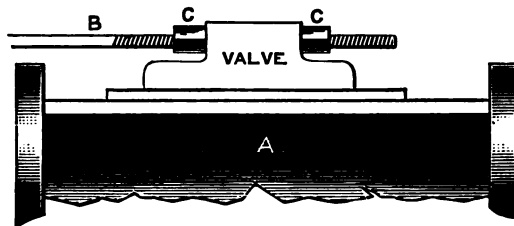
SETTING AN ECCENTRIC (SHOWING MEANS FOR FINDING LENGTH OF ROD).
